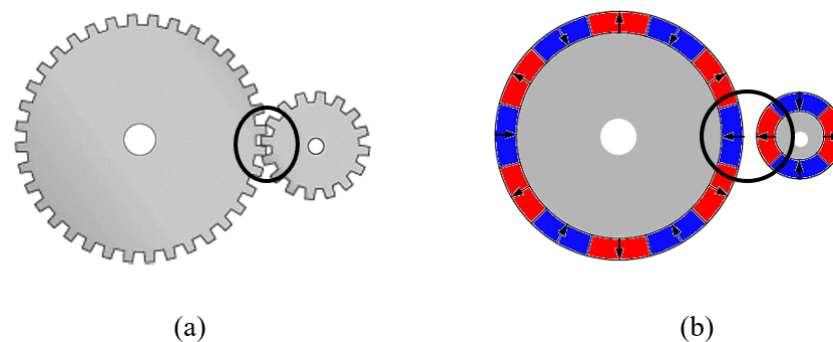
Analog gears: (a) Mechanical spur gear; (b) Magnetic spur gear.
